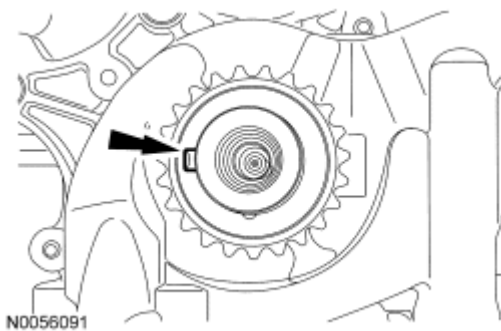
Rotating Crankshaft Counterclockwise Until Crankshaft Dowel Pin Is In 9 O'clock Position
